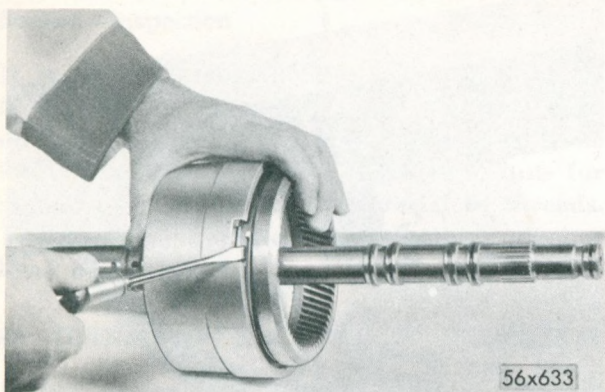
Removal and Installation of Output Shaft Drive Housing Snap Ring
